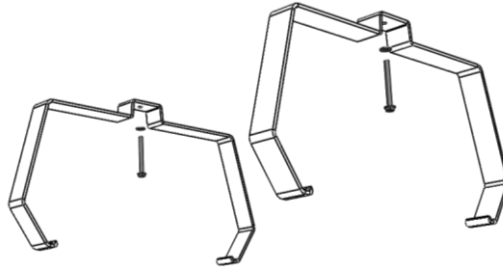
installation of the brackets into the ceiling. The distance between the hole-centers of the brackets must be no less than 356 mm [14.0"] and no greater than 416 mm [16.4"].
